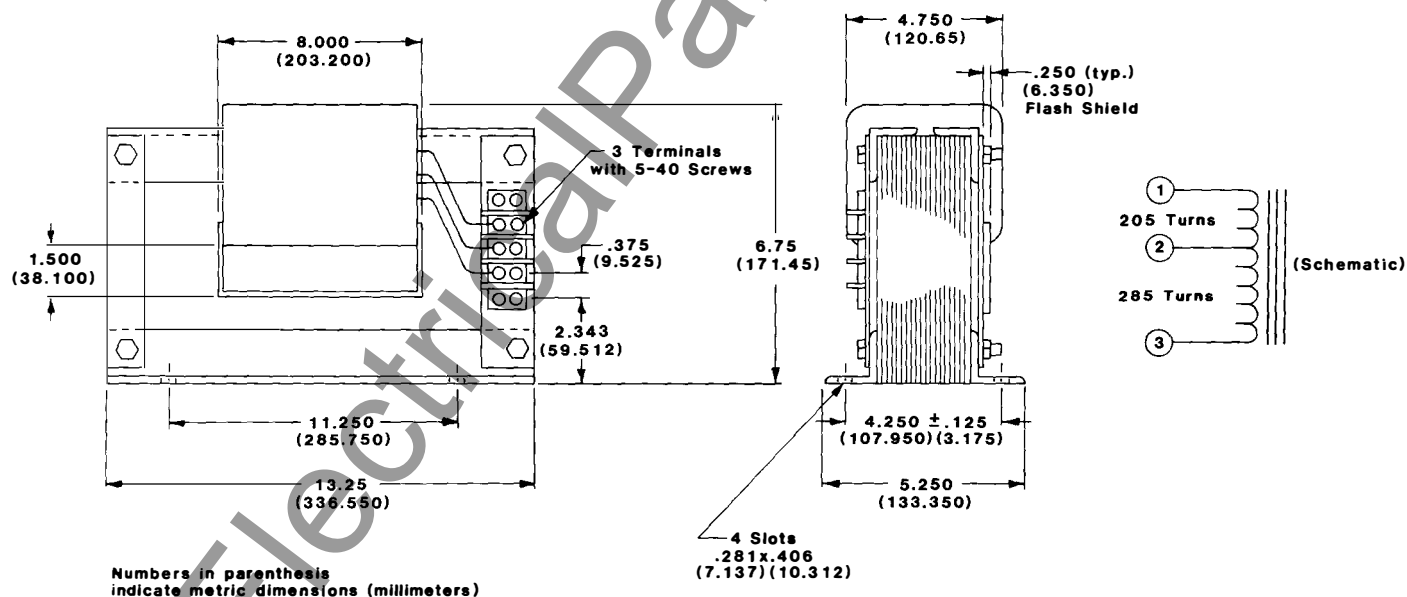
OUTLINE DRAWING, CURRENT TRANSFORMER, P/N BE 16866-001
